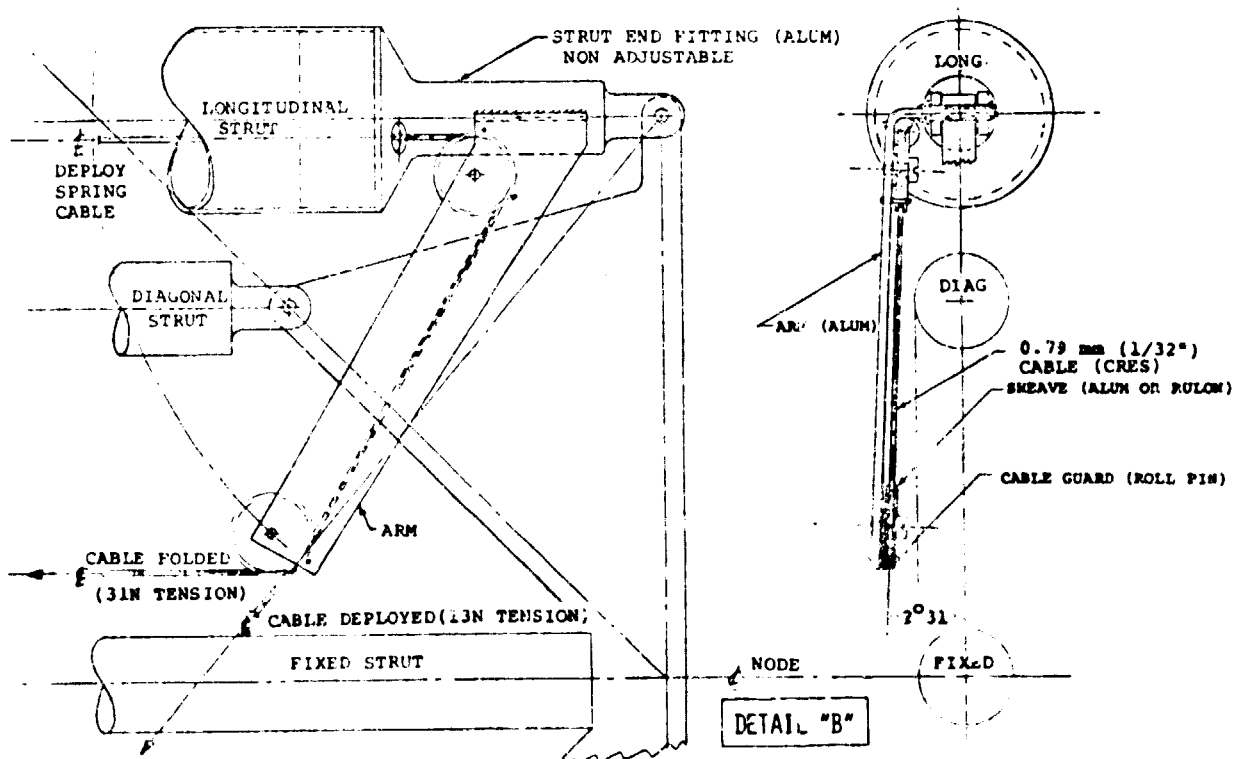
DEPLOY CABLE AND LEVER ARRANGEMENT FOR DOUBLE FOLD
